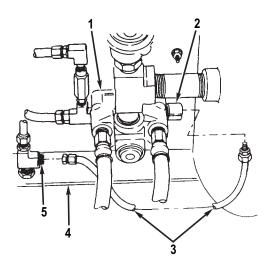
Airbrake Valve-to-Air Reservoir Tube Assembly Replacement.
